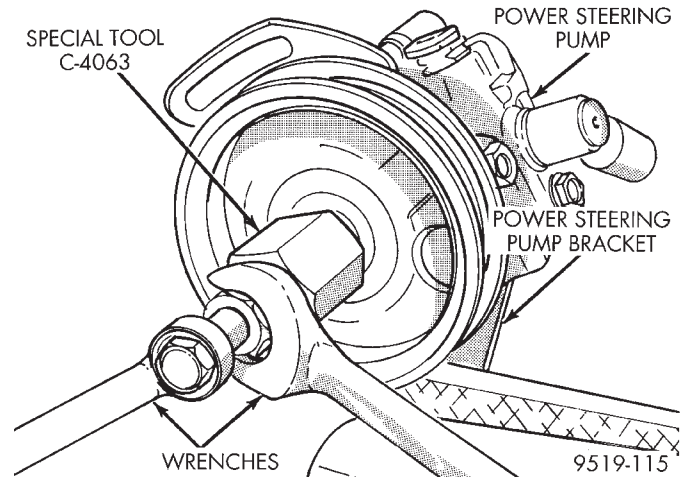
Installing Pulley On Shaft Of Power Steering Pump
